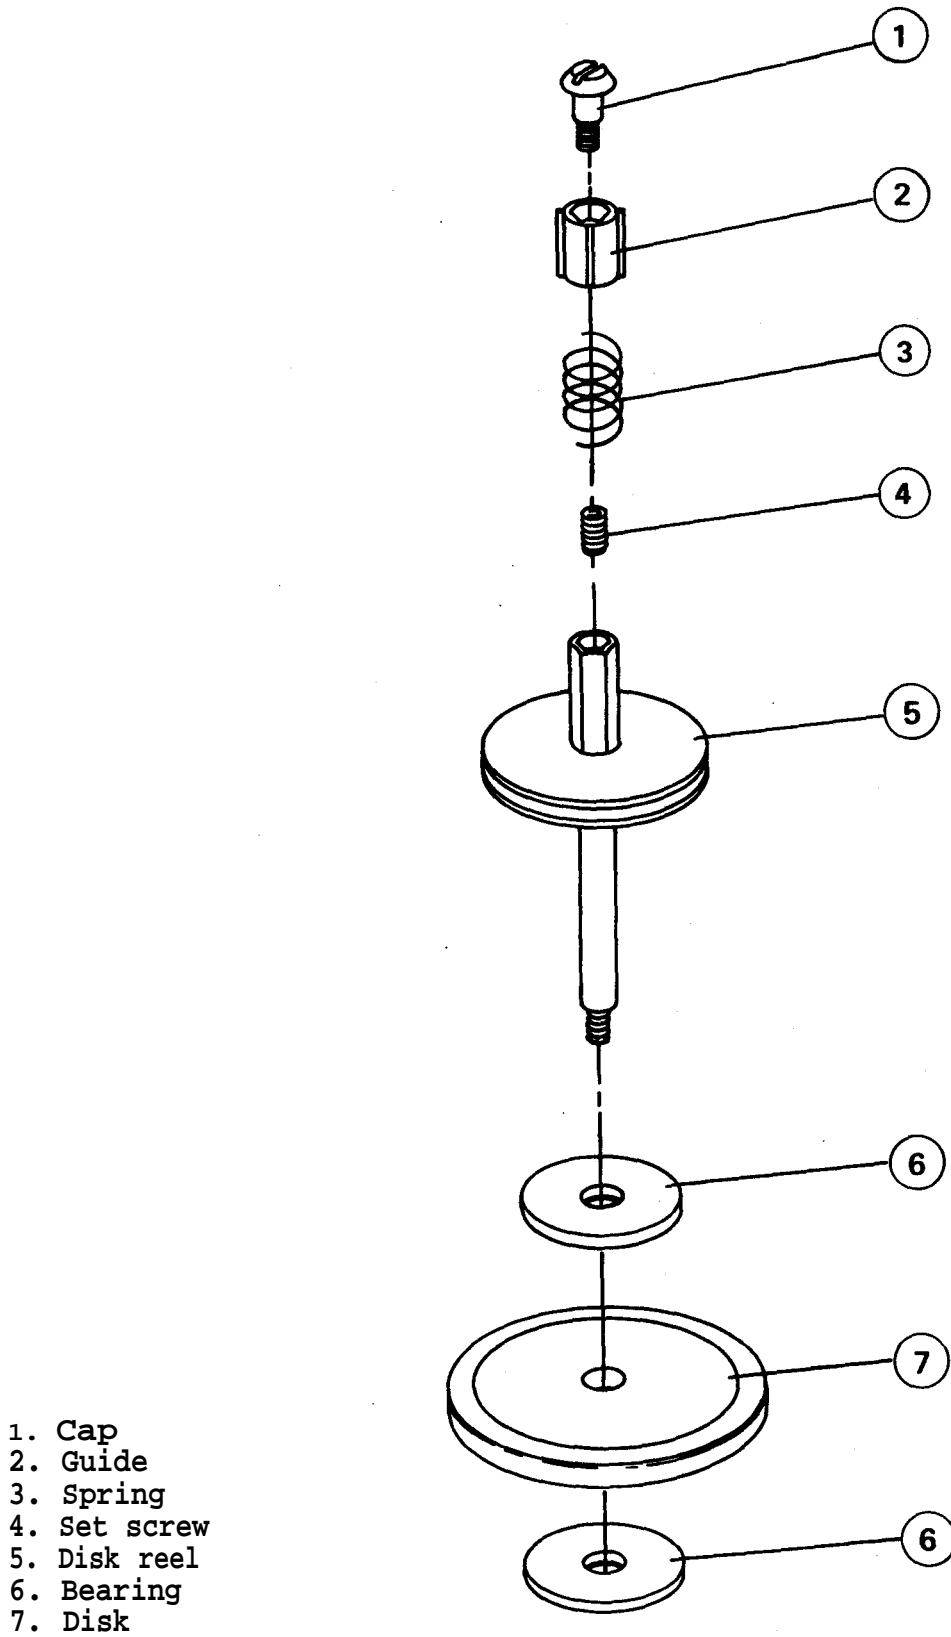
Disk Reel (3A4A16), Assemble/Disassemble
